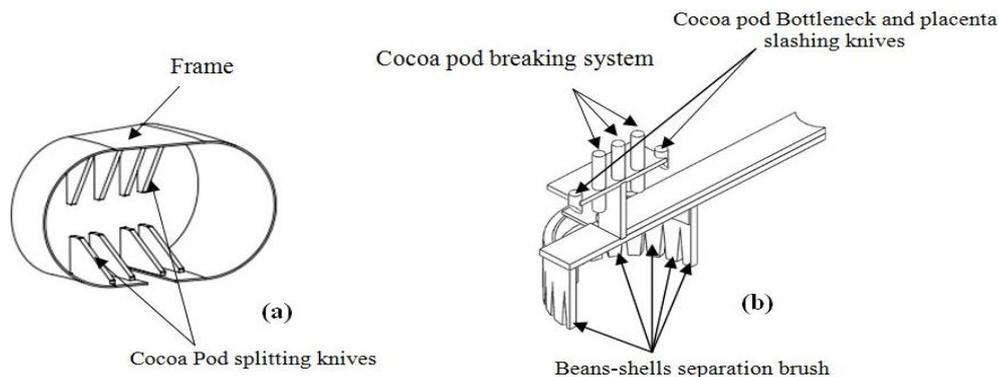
Design of the Cocoa Pod Splitting Knives: (A) Cocoa Pod Splitting Frame and Knives (with Dimensions), (B) Cocoa Pod Slashing Knives Ready to the End of the Cocoa Pod.
